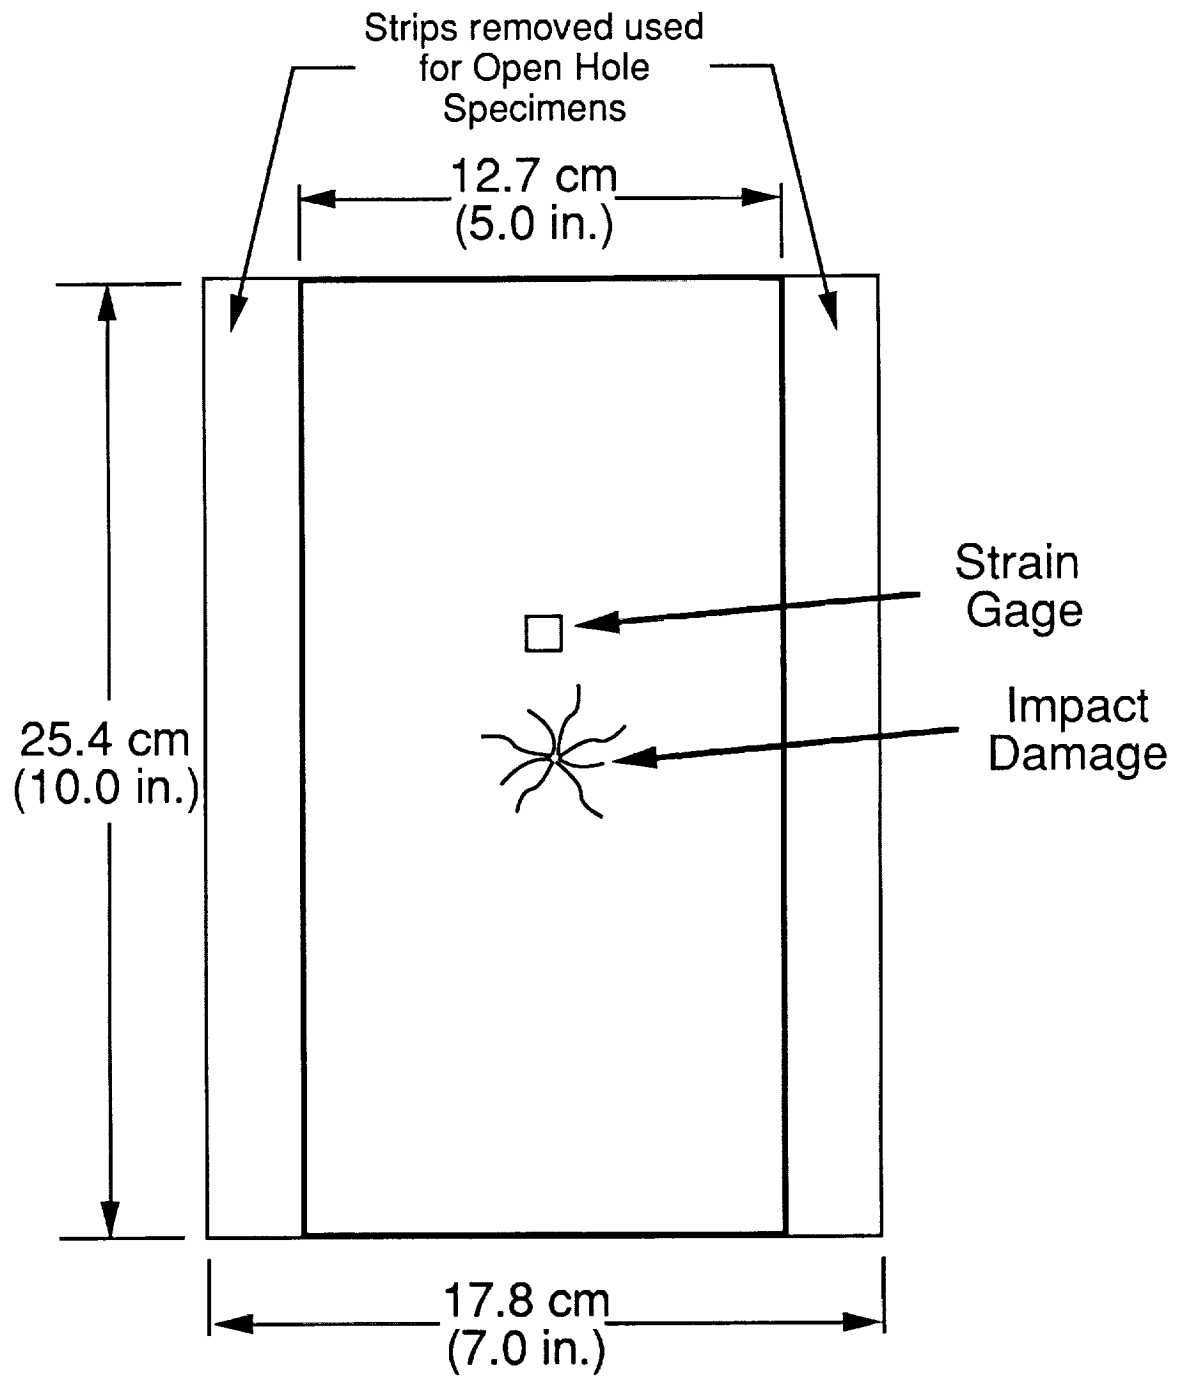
A drawing of Post-Impact Fatigue Test Specimen Dimensions
